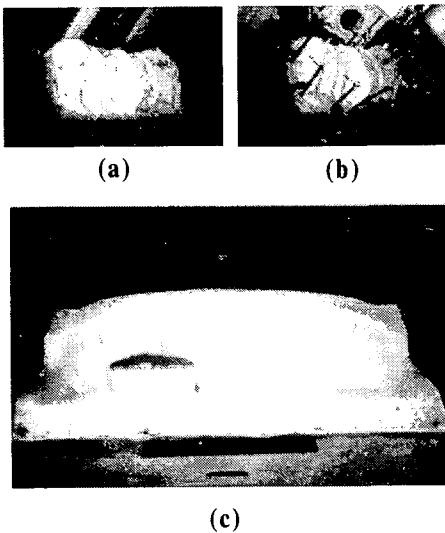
Composite material layer of lower mold (a), RTV casting process (b), Completed lower mold (c)
